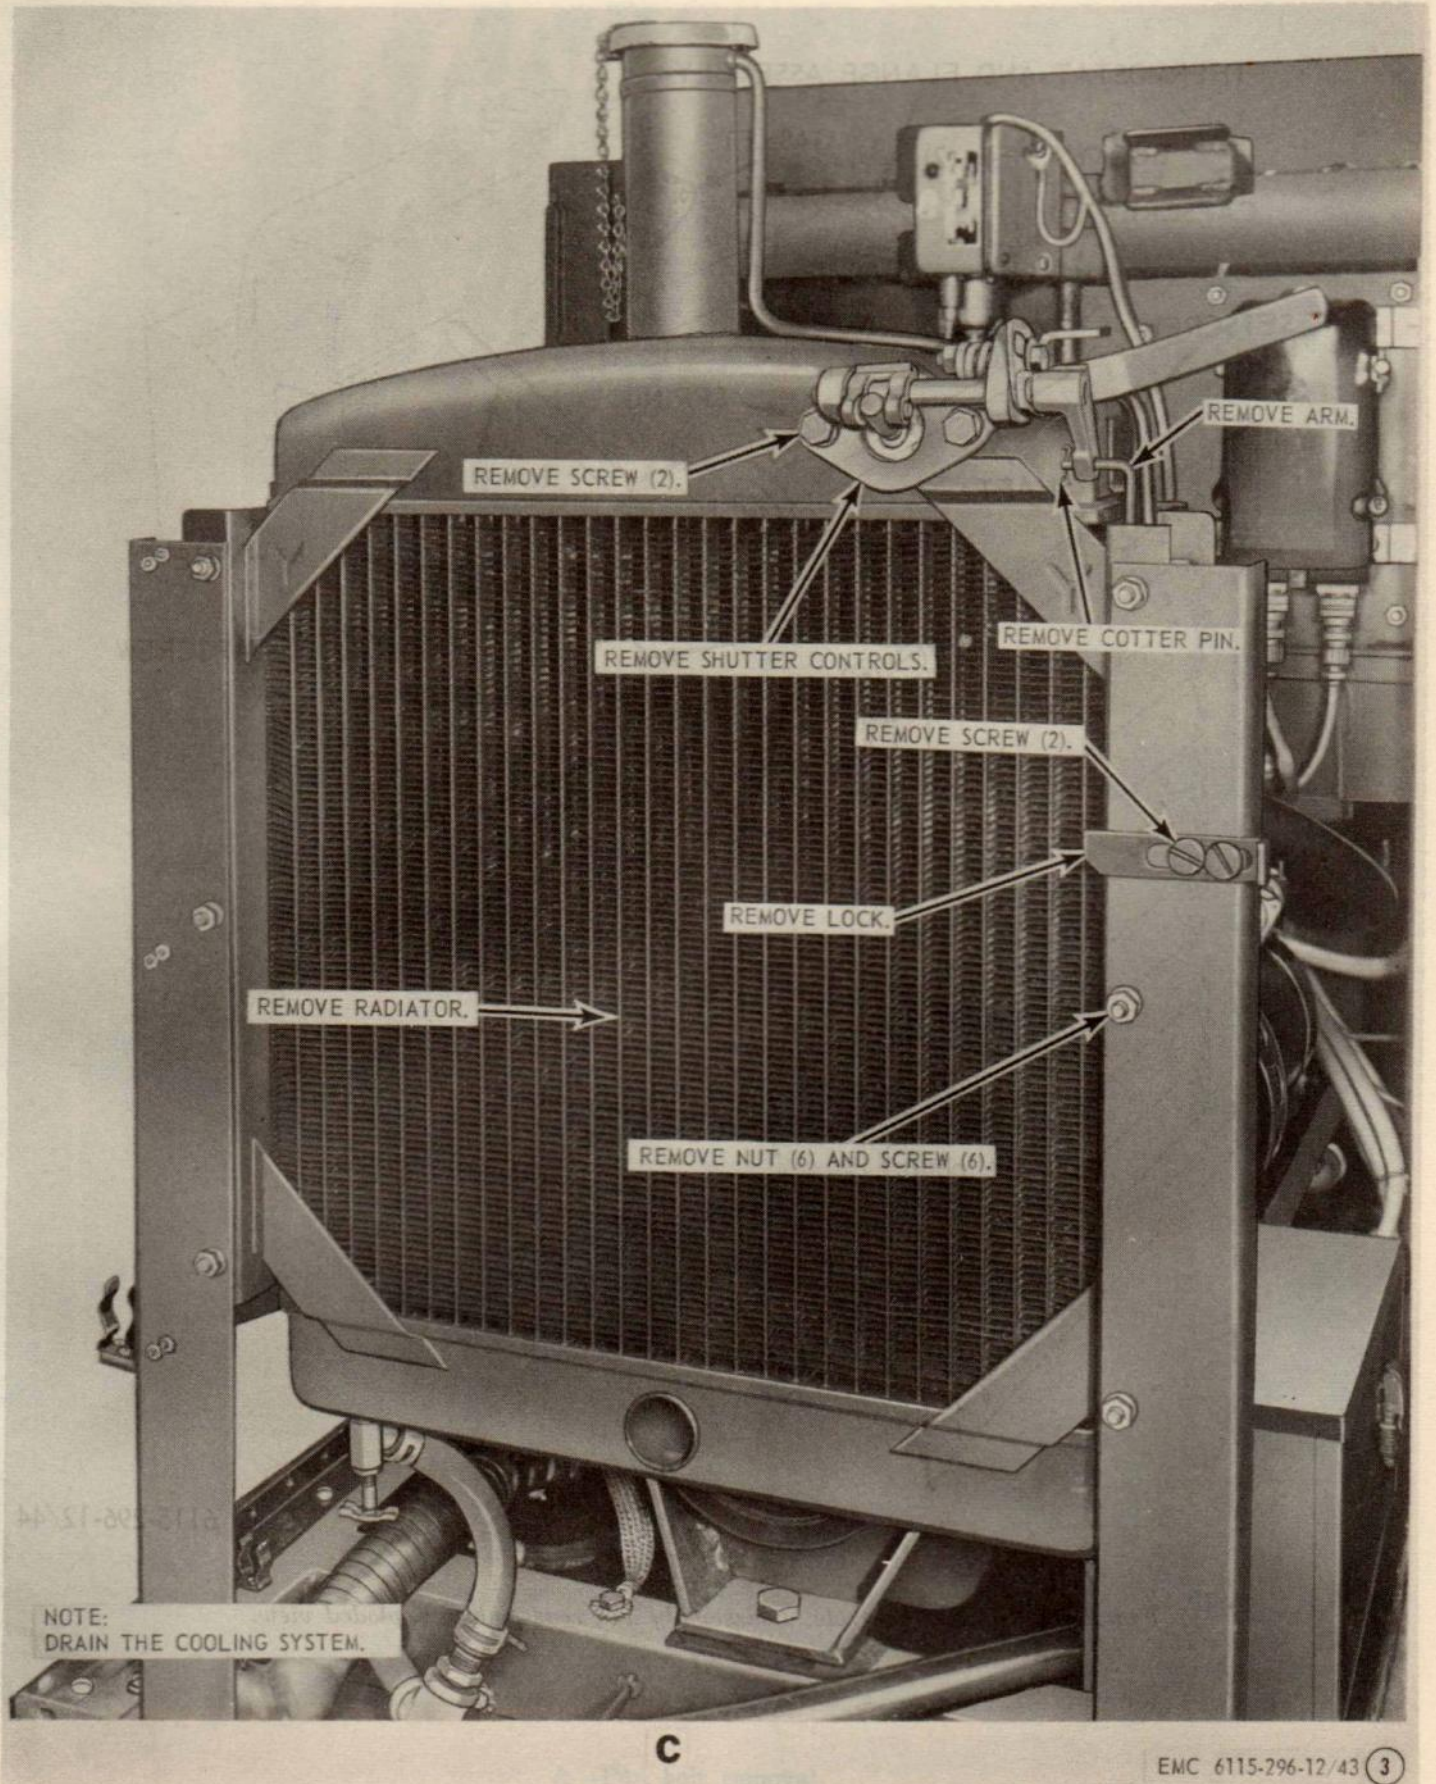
Shutter controls, shutter, and radiator, removal and installation.
